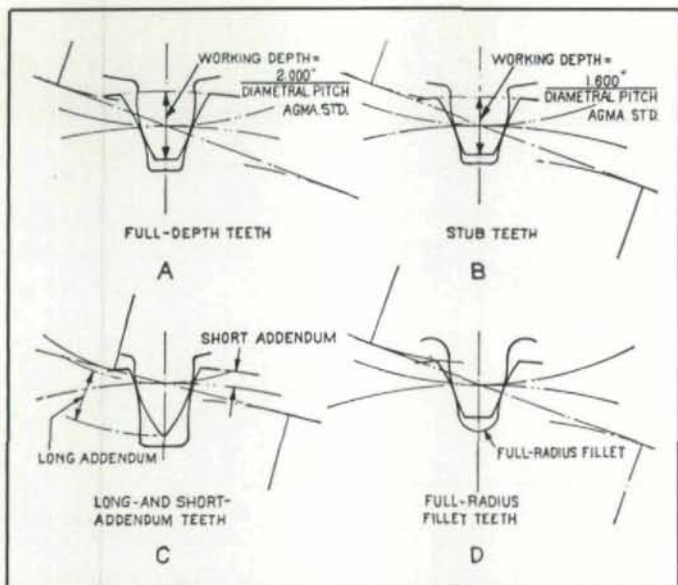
Diagram illustrating various forms of involute gear teeth.
